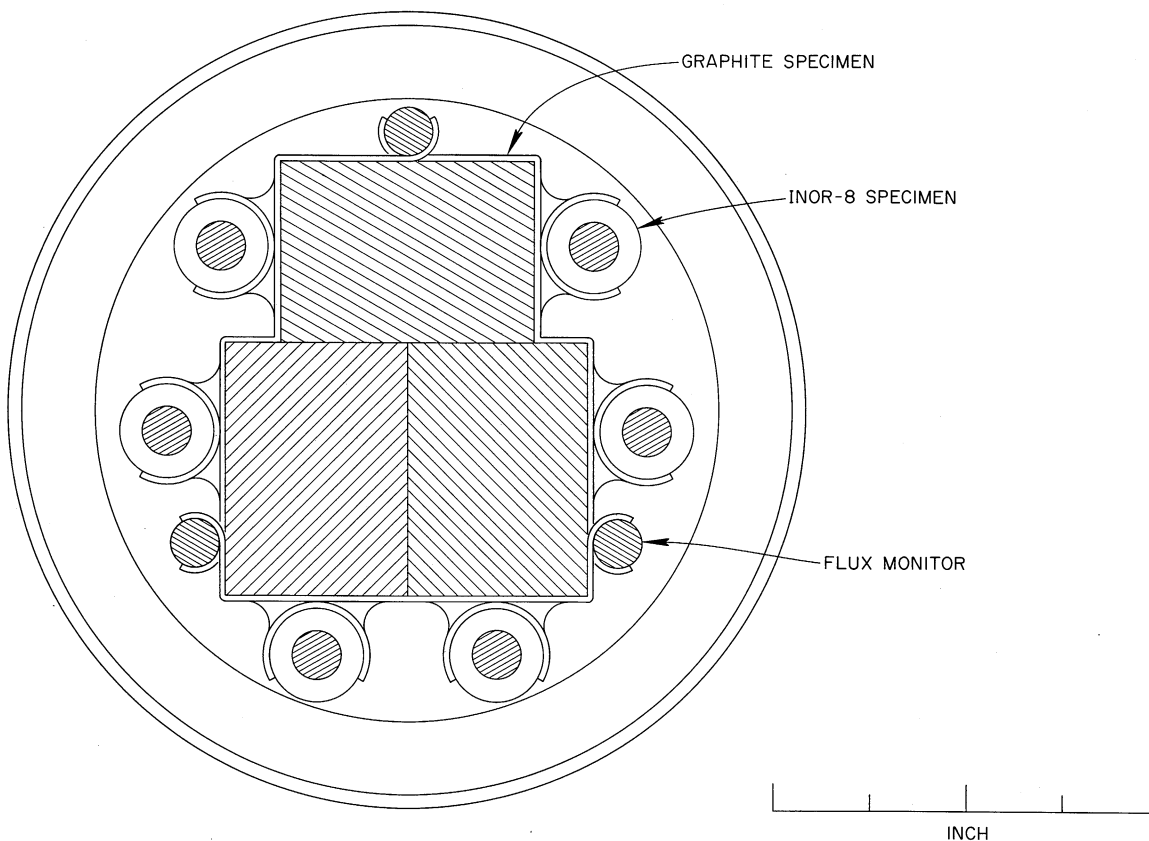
Surveillance Specimen Assembly. Cross section.
